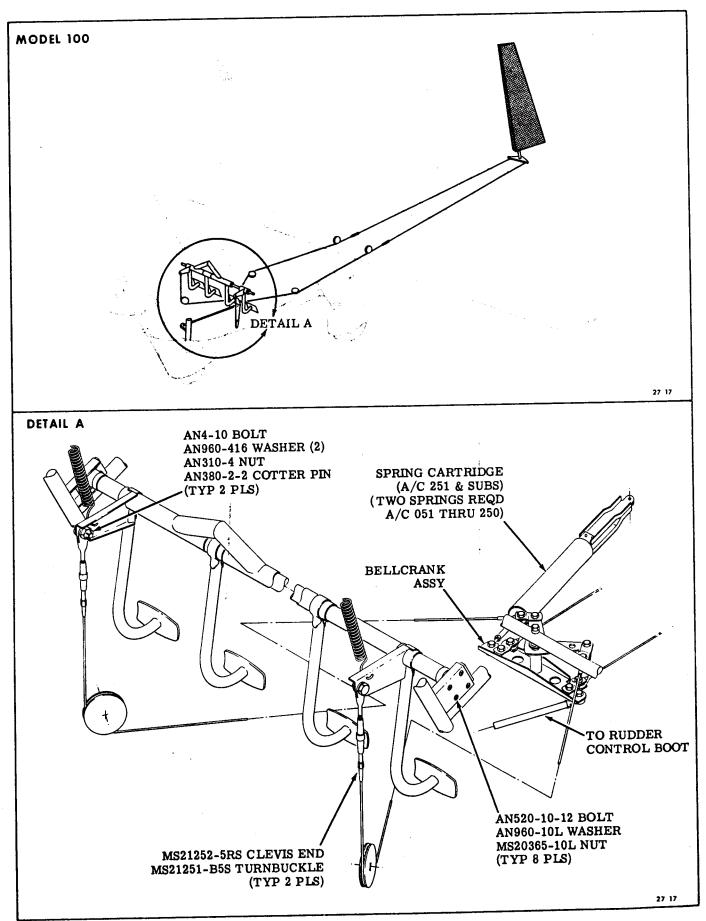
Rudder Control System (Sheet 1 of 2)
